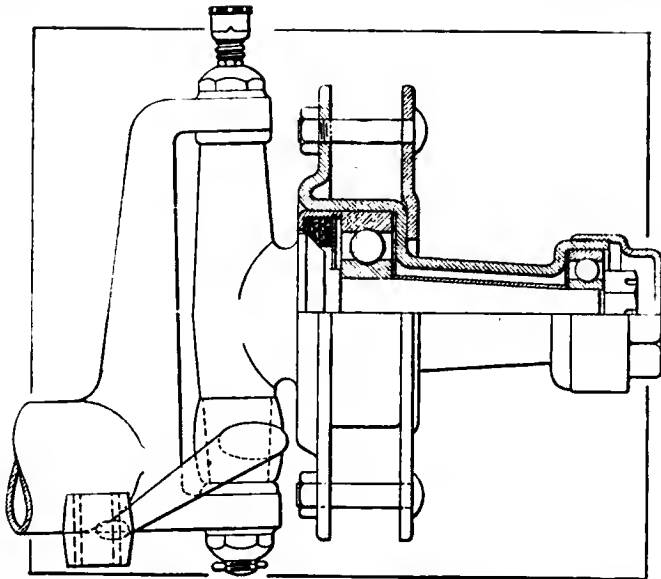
Depicting annular type ball bearings in a hub made of drawn steel, with a drop forged knuckle
